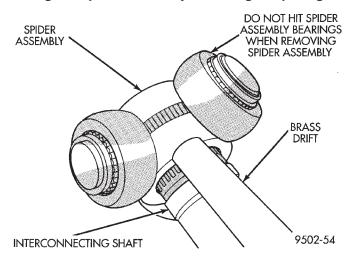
Spider Assembly Removal from Interconnecting Shaft
